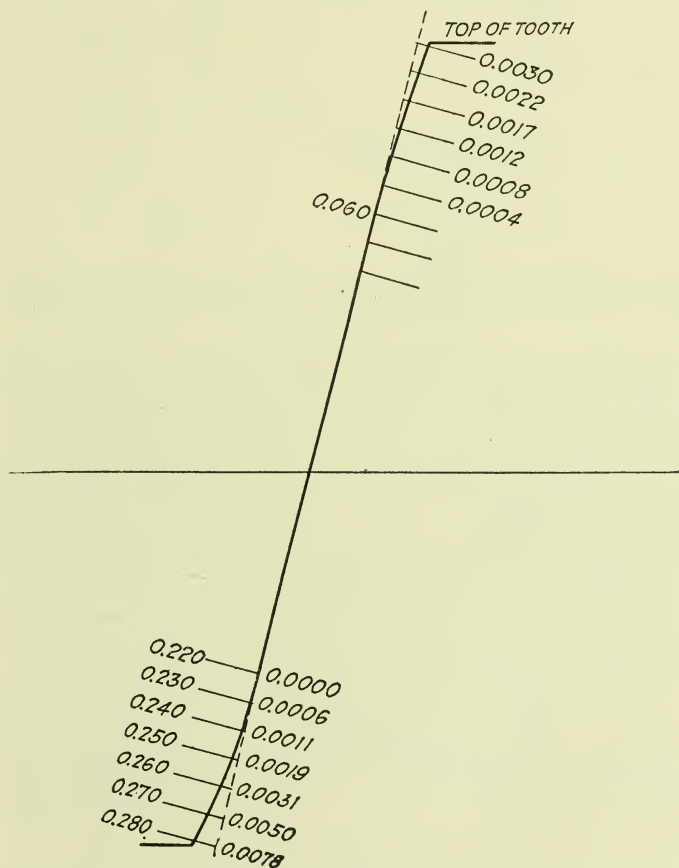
OUTLINE OF THE HOB FORM SELECTED FROM THE LAYOUT SHOWN IN FIG. 10
